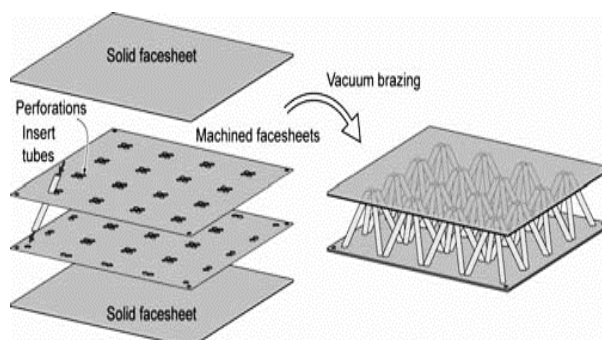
Using perforated auxiliary plates to hold the tubes in place during brazing [6]
